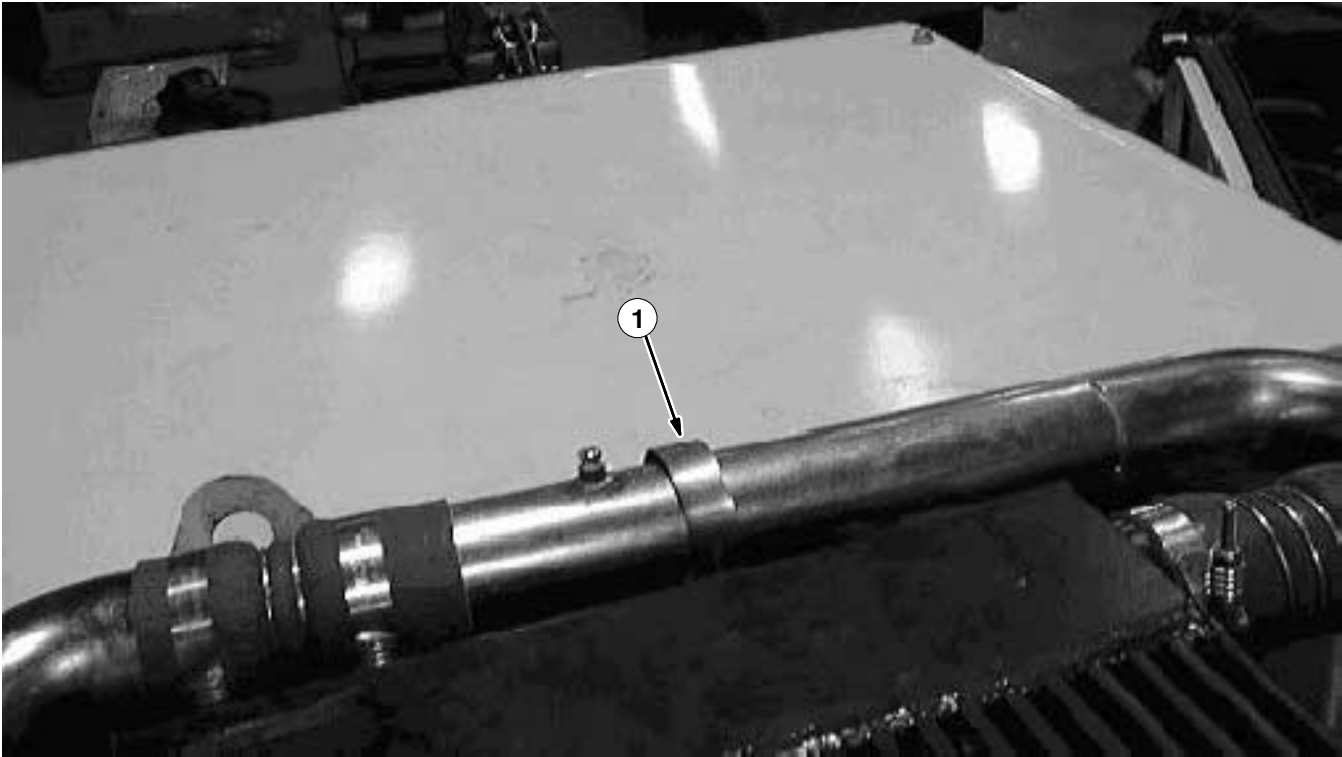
Cummins 6 Cyl. Air Cooler Group
